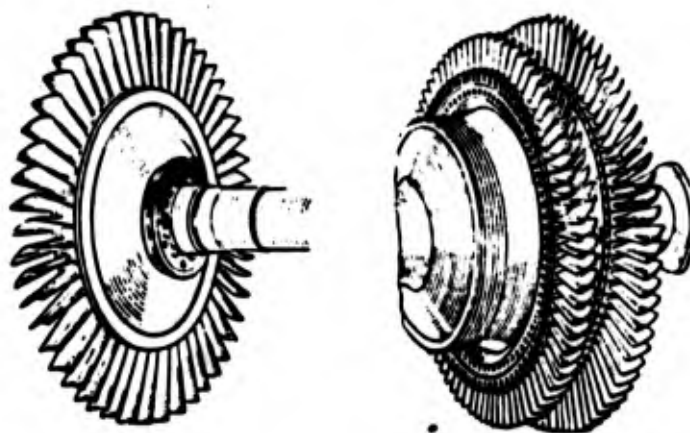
The rotor of a gas turbine, driving the compressor of the turbojet engine.
